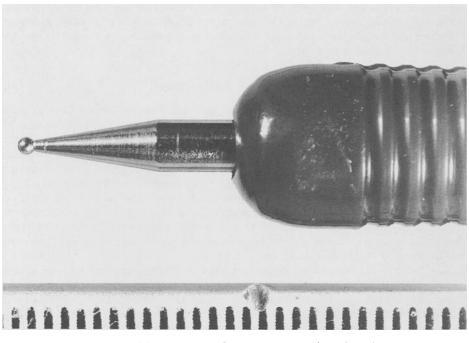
Tip of the engraving tool (every division in the scale = 1 mm).
